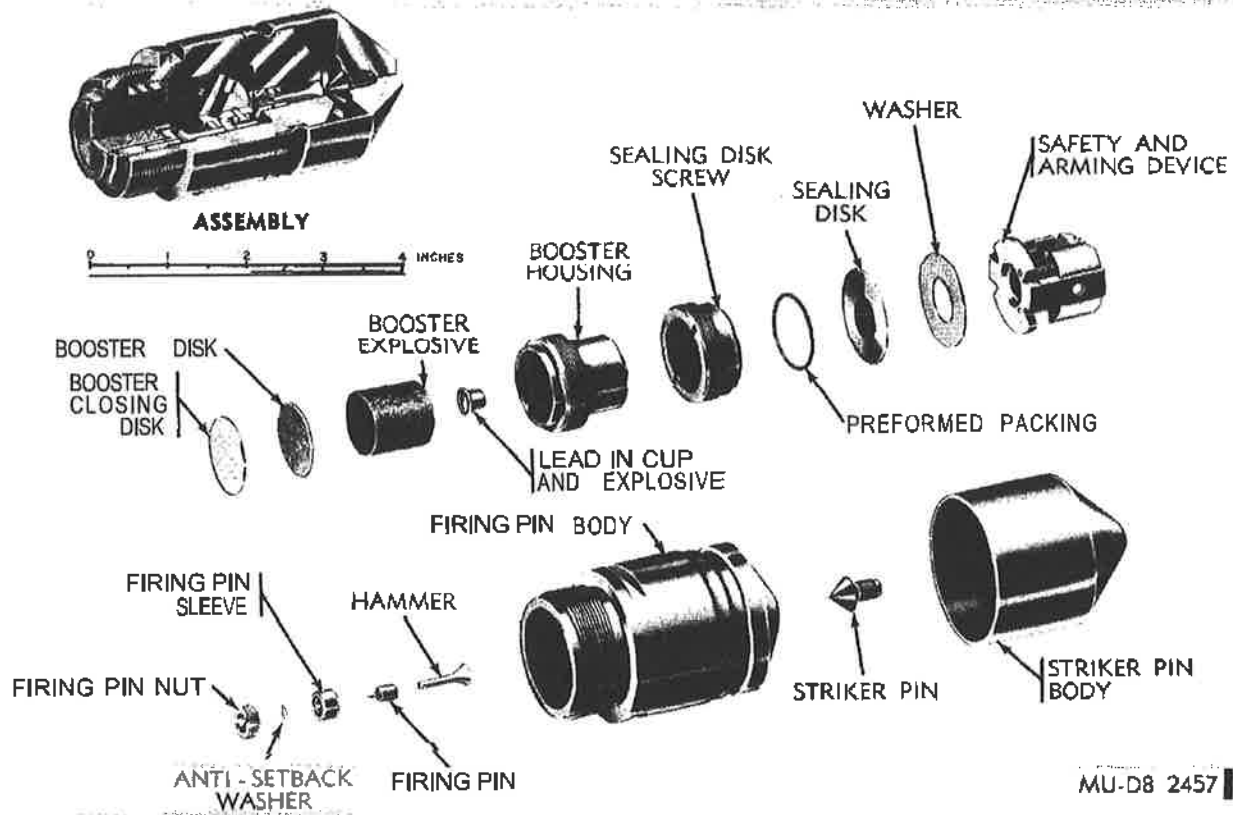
1-30 Cutaway and Exploded Views of Fuzes M423 and M427
